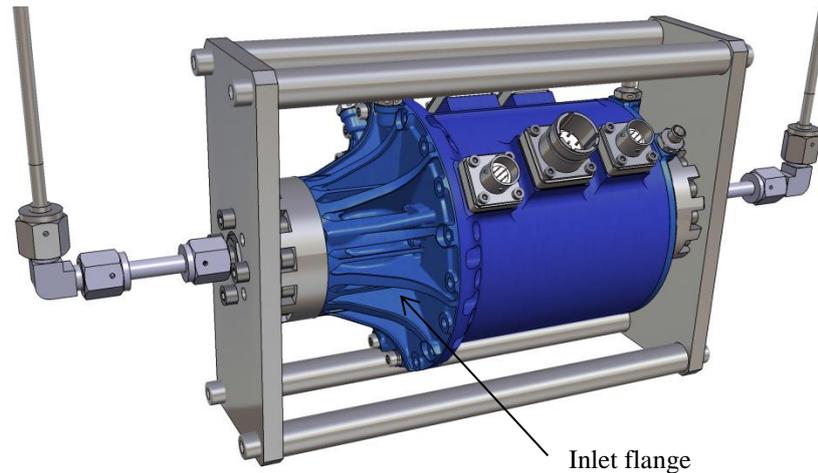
OCV/TCV/RGV demonstrator valve mounted for the cold test campaign (the geometry of the inlet flange is manufactured using an ALM technique)
